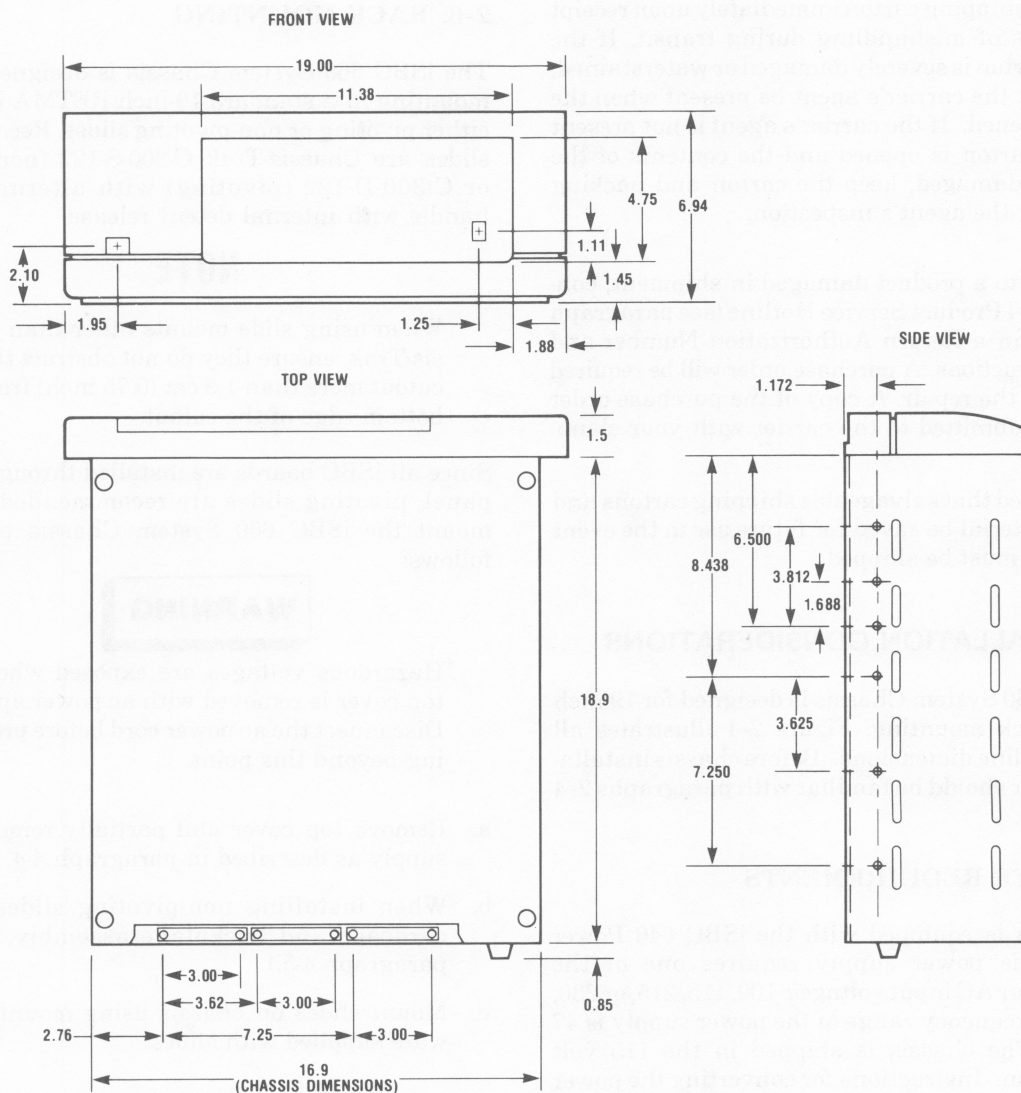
iSBC 660 Physical Dimensions (Inches)
